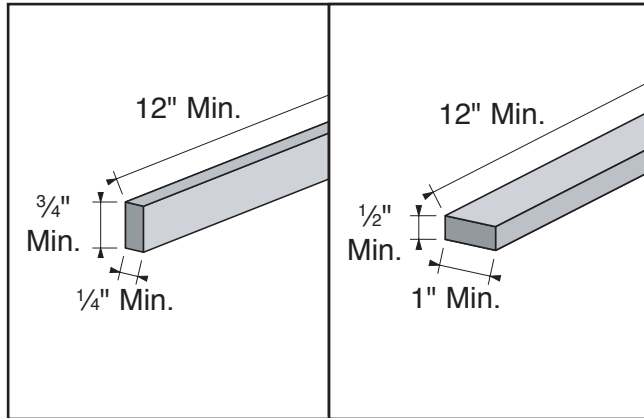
Minimum dimensions for edge jointing and surface planing (jointer).
